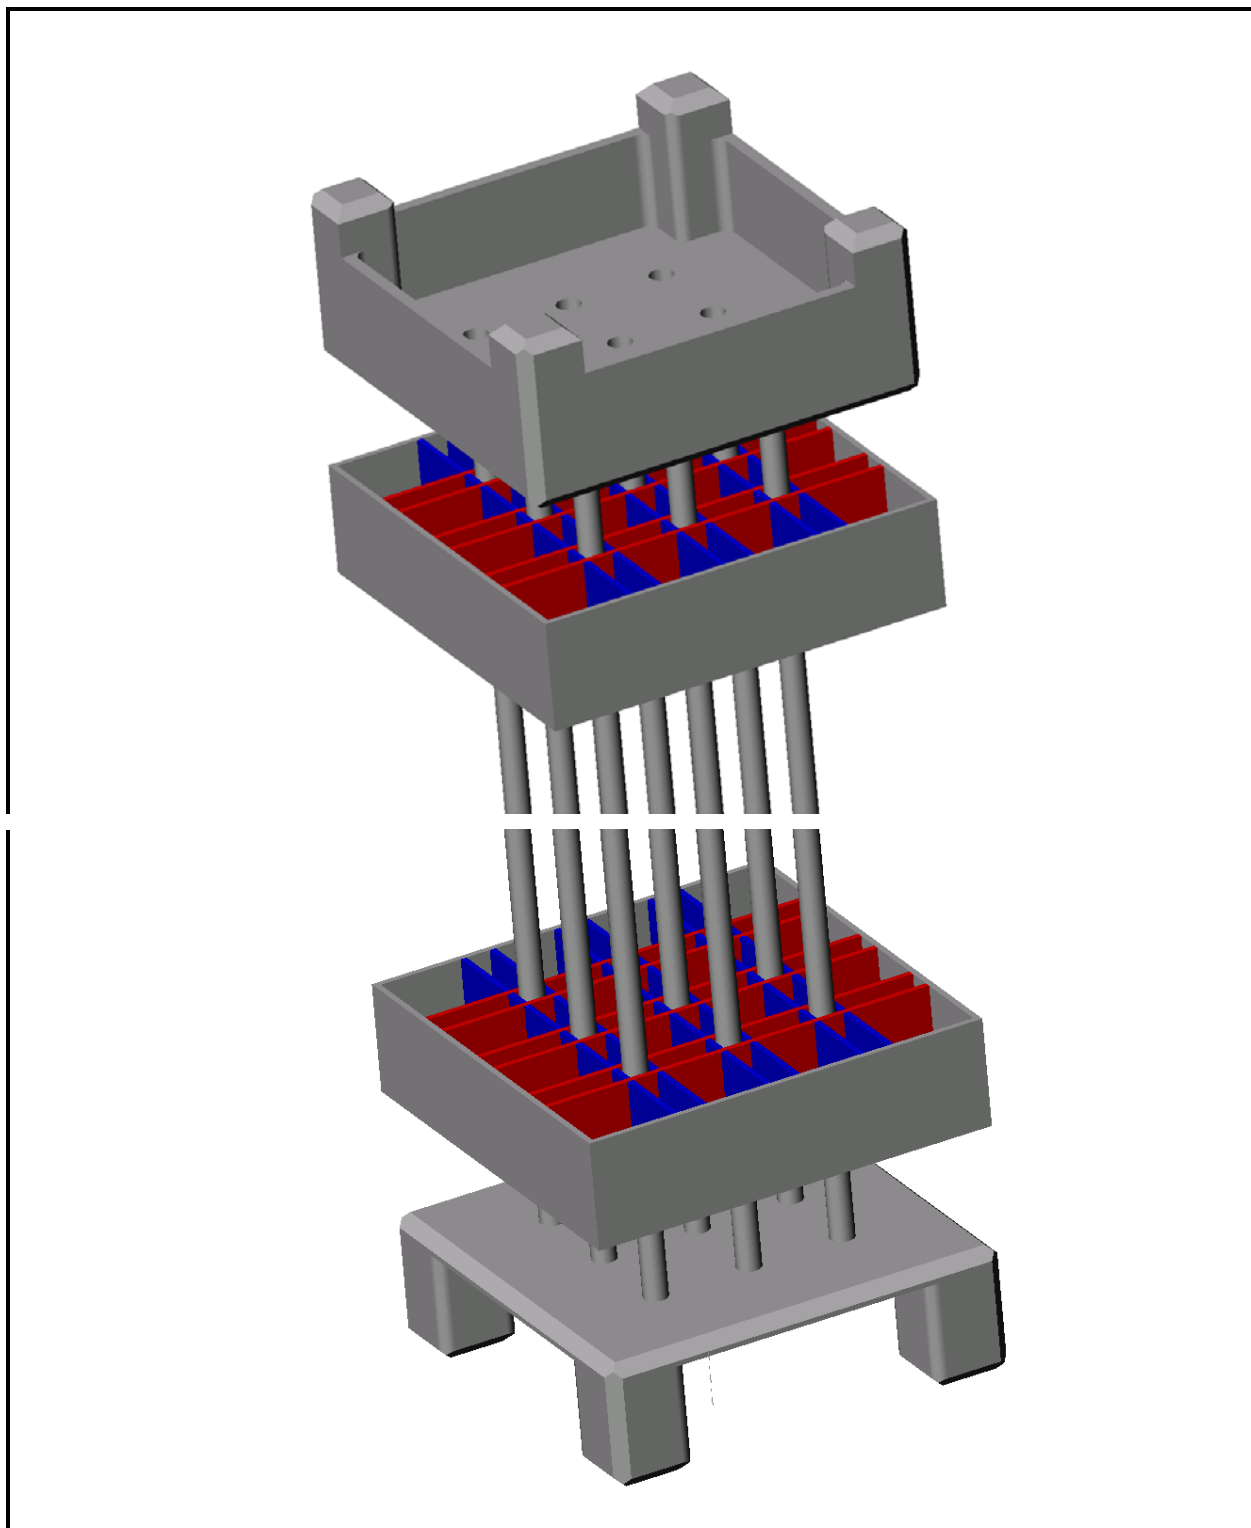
Dummy Fuel Assembly (Fill Rods Removed for Clarity)
